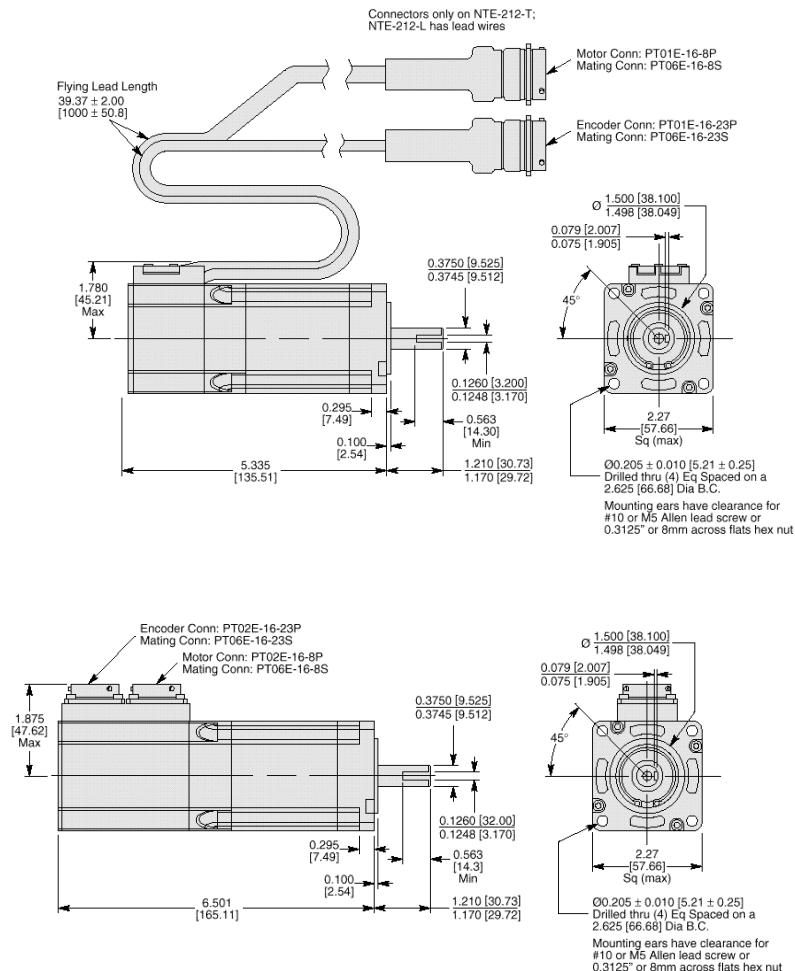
NTE Motors; English Face (NEMA 23 with 3/8 inch shaft)
